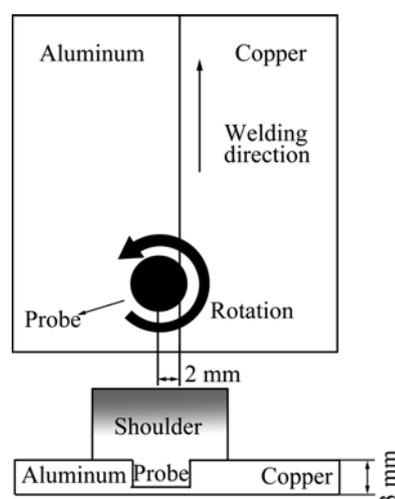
Schematic illustration showing set-up of dissimilar FSW
